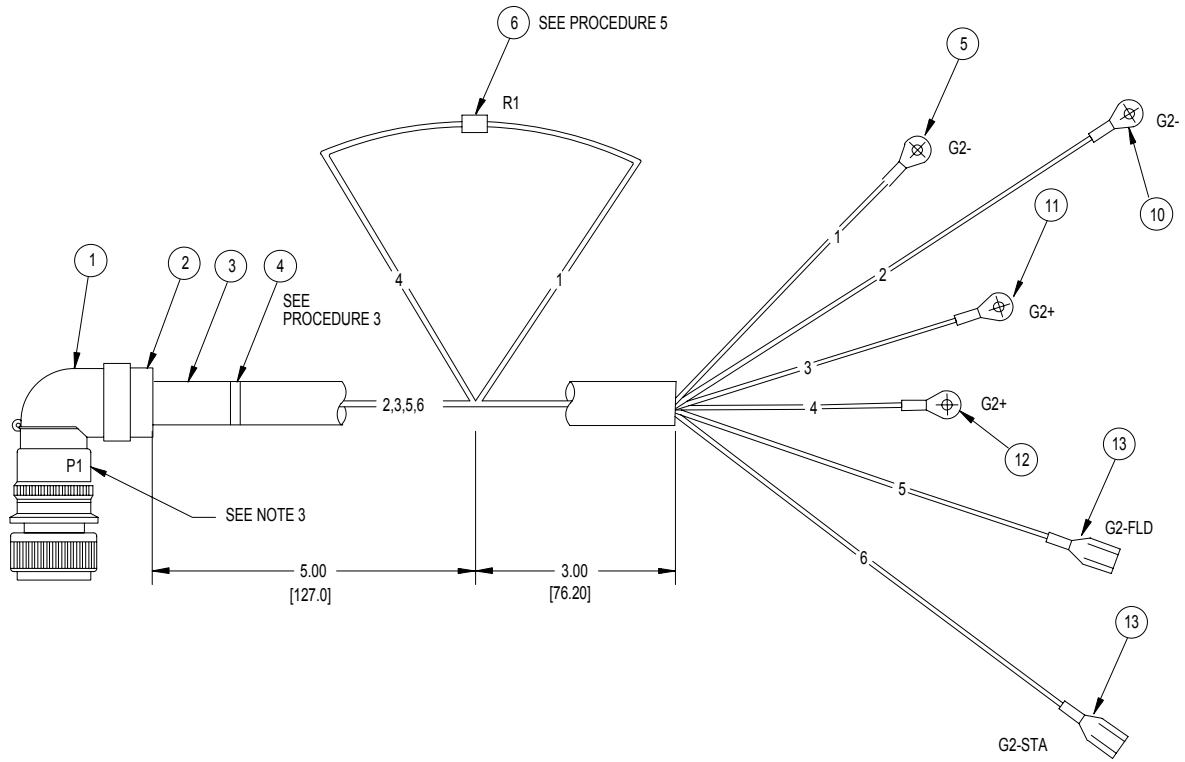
Wiring Harness, Alternator (P/N: 95-8028) (Sheet 1 of 2)
